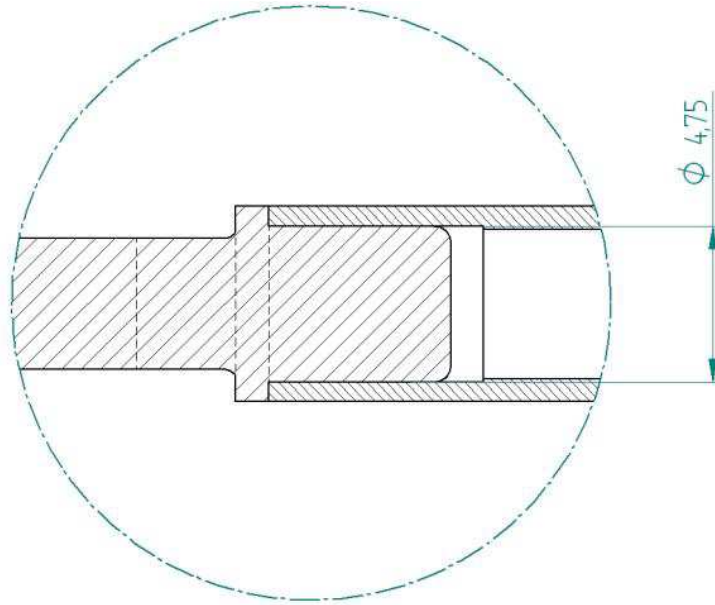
Plug and socket detail, upper shaft on left, lower shaft on right
